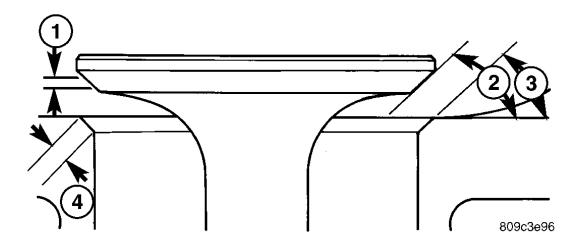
Valve Face & Seat Courtesy of CHRYSLER LLC
